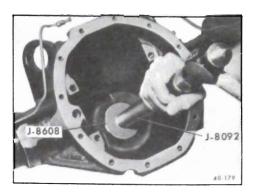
Installing Rear Pinion Bearing Outer Race
